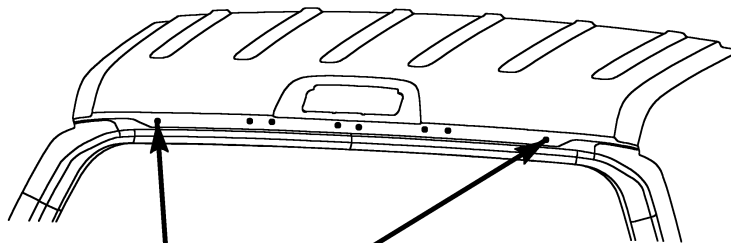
ROOF PANEL AND BODY SIDE WELD AND ADHESIVE LOCATIONS - SUNROOF EQUIPPED
